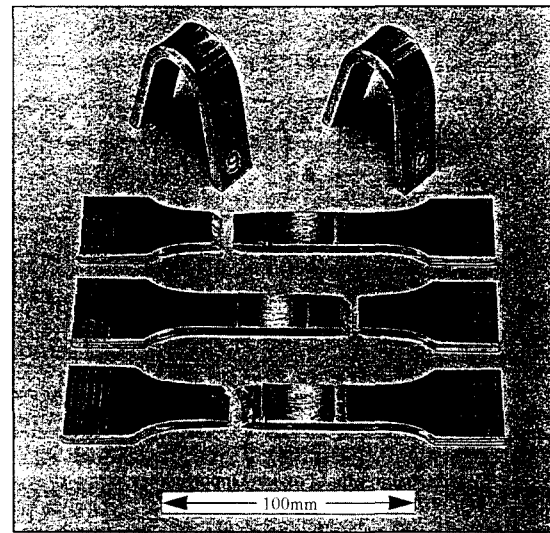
A bend(180°) and tensile tested welds made in 5083Al welds
